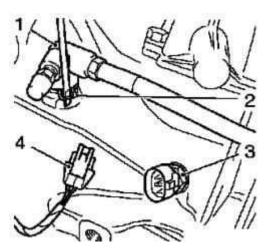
Removing the elements of supply and discharge line: 1 - pressure pipe with nipple, 2 - retaining clamp, 3 - switch reversing lamps, 4 - the wiring harness connector
